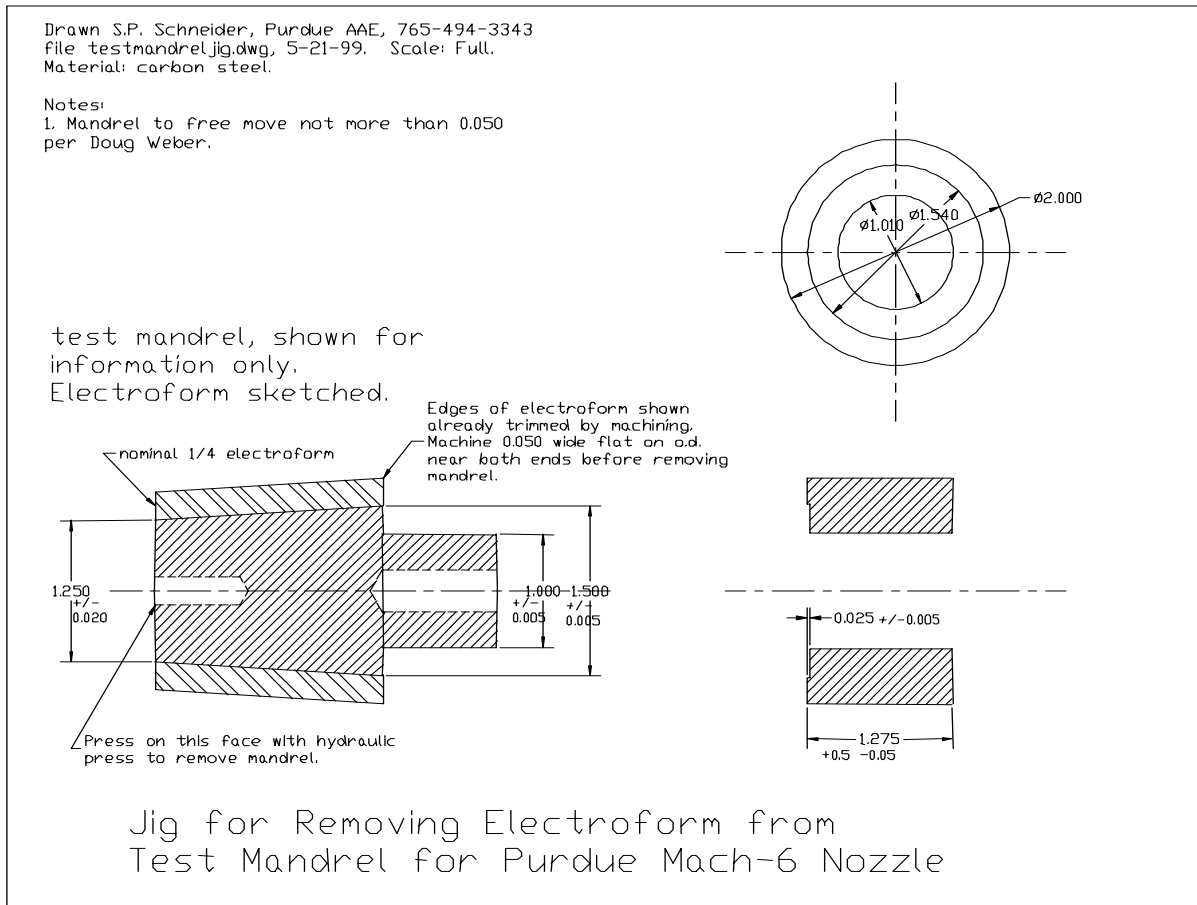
Drawing of Test Mandrel Electroform with Removal Jig
